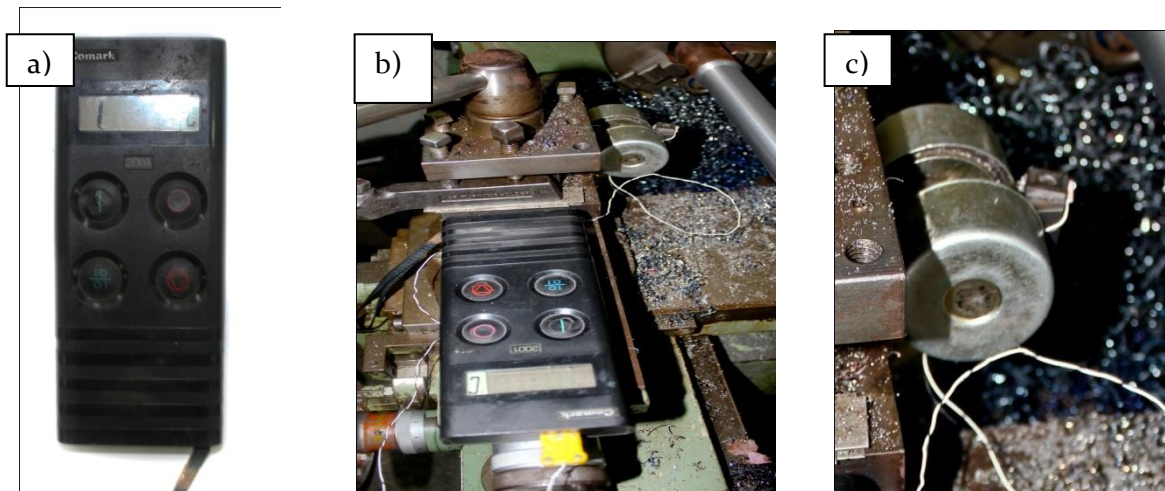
Photograph of arrangement for measuring cutting temperature a) thermocouple b) experimental setup c) thermocouple hot end attached with insert tip
